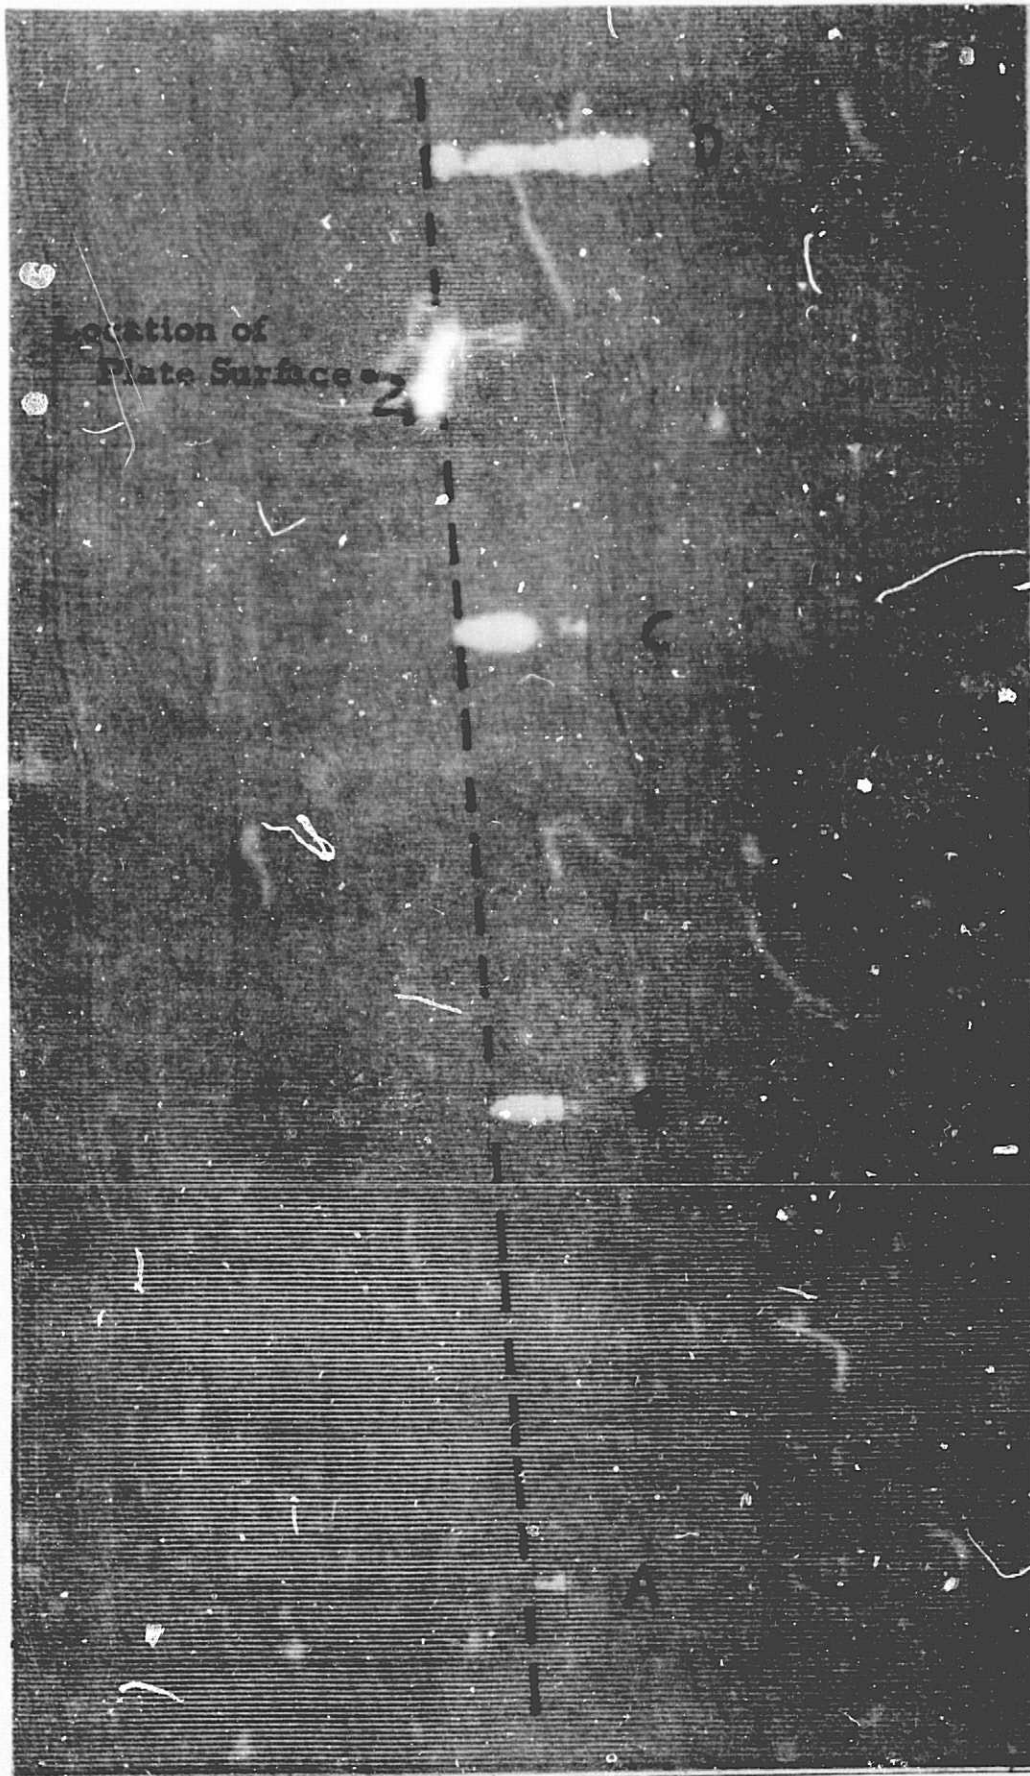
Shuttle delta ultrasonic scan recording showing test hole indications in the 0.500-inch thick aluminum plate.
